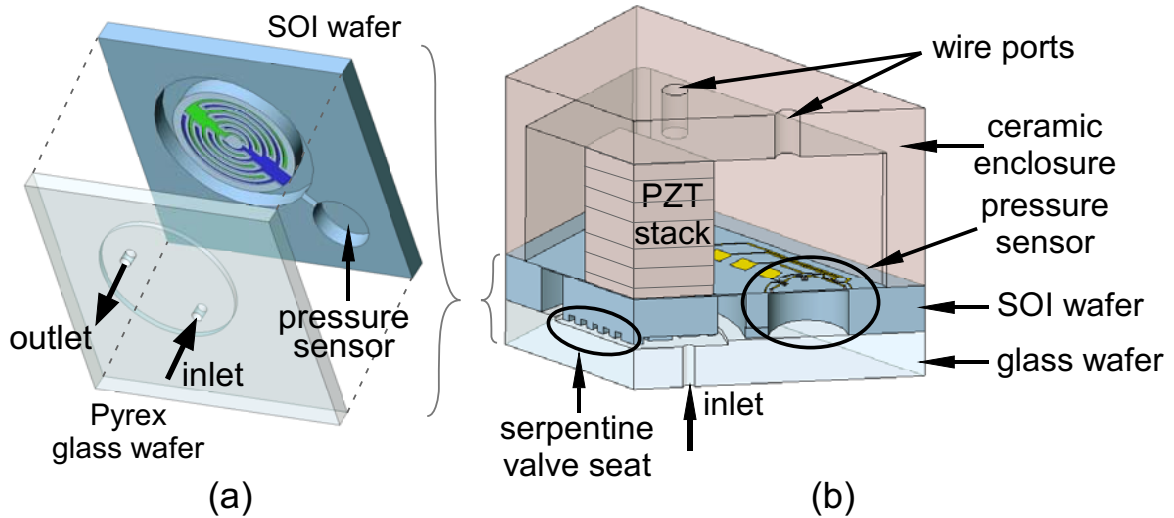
Microvalve concepts: (a) A valve plate suspended by a Si membrane with integrated sensors viewed from the bottom. The RTD sensor is located on the backside of the wafer and is not visible. (b) A cut away view of an assembled ceramic-PZT-Si-glass valve structure.
